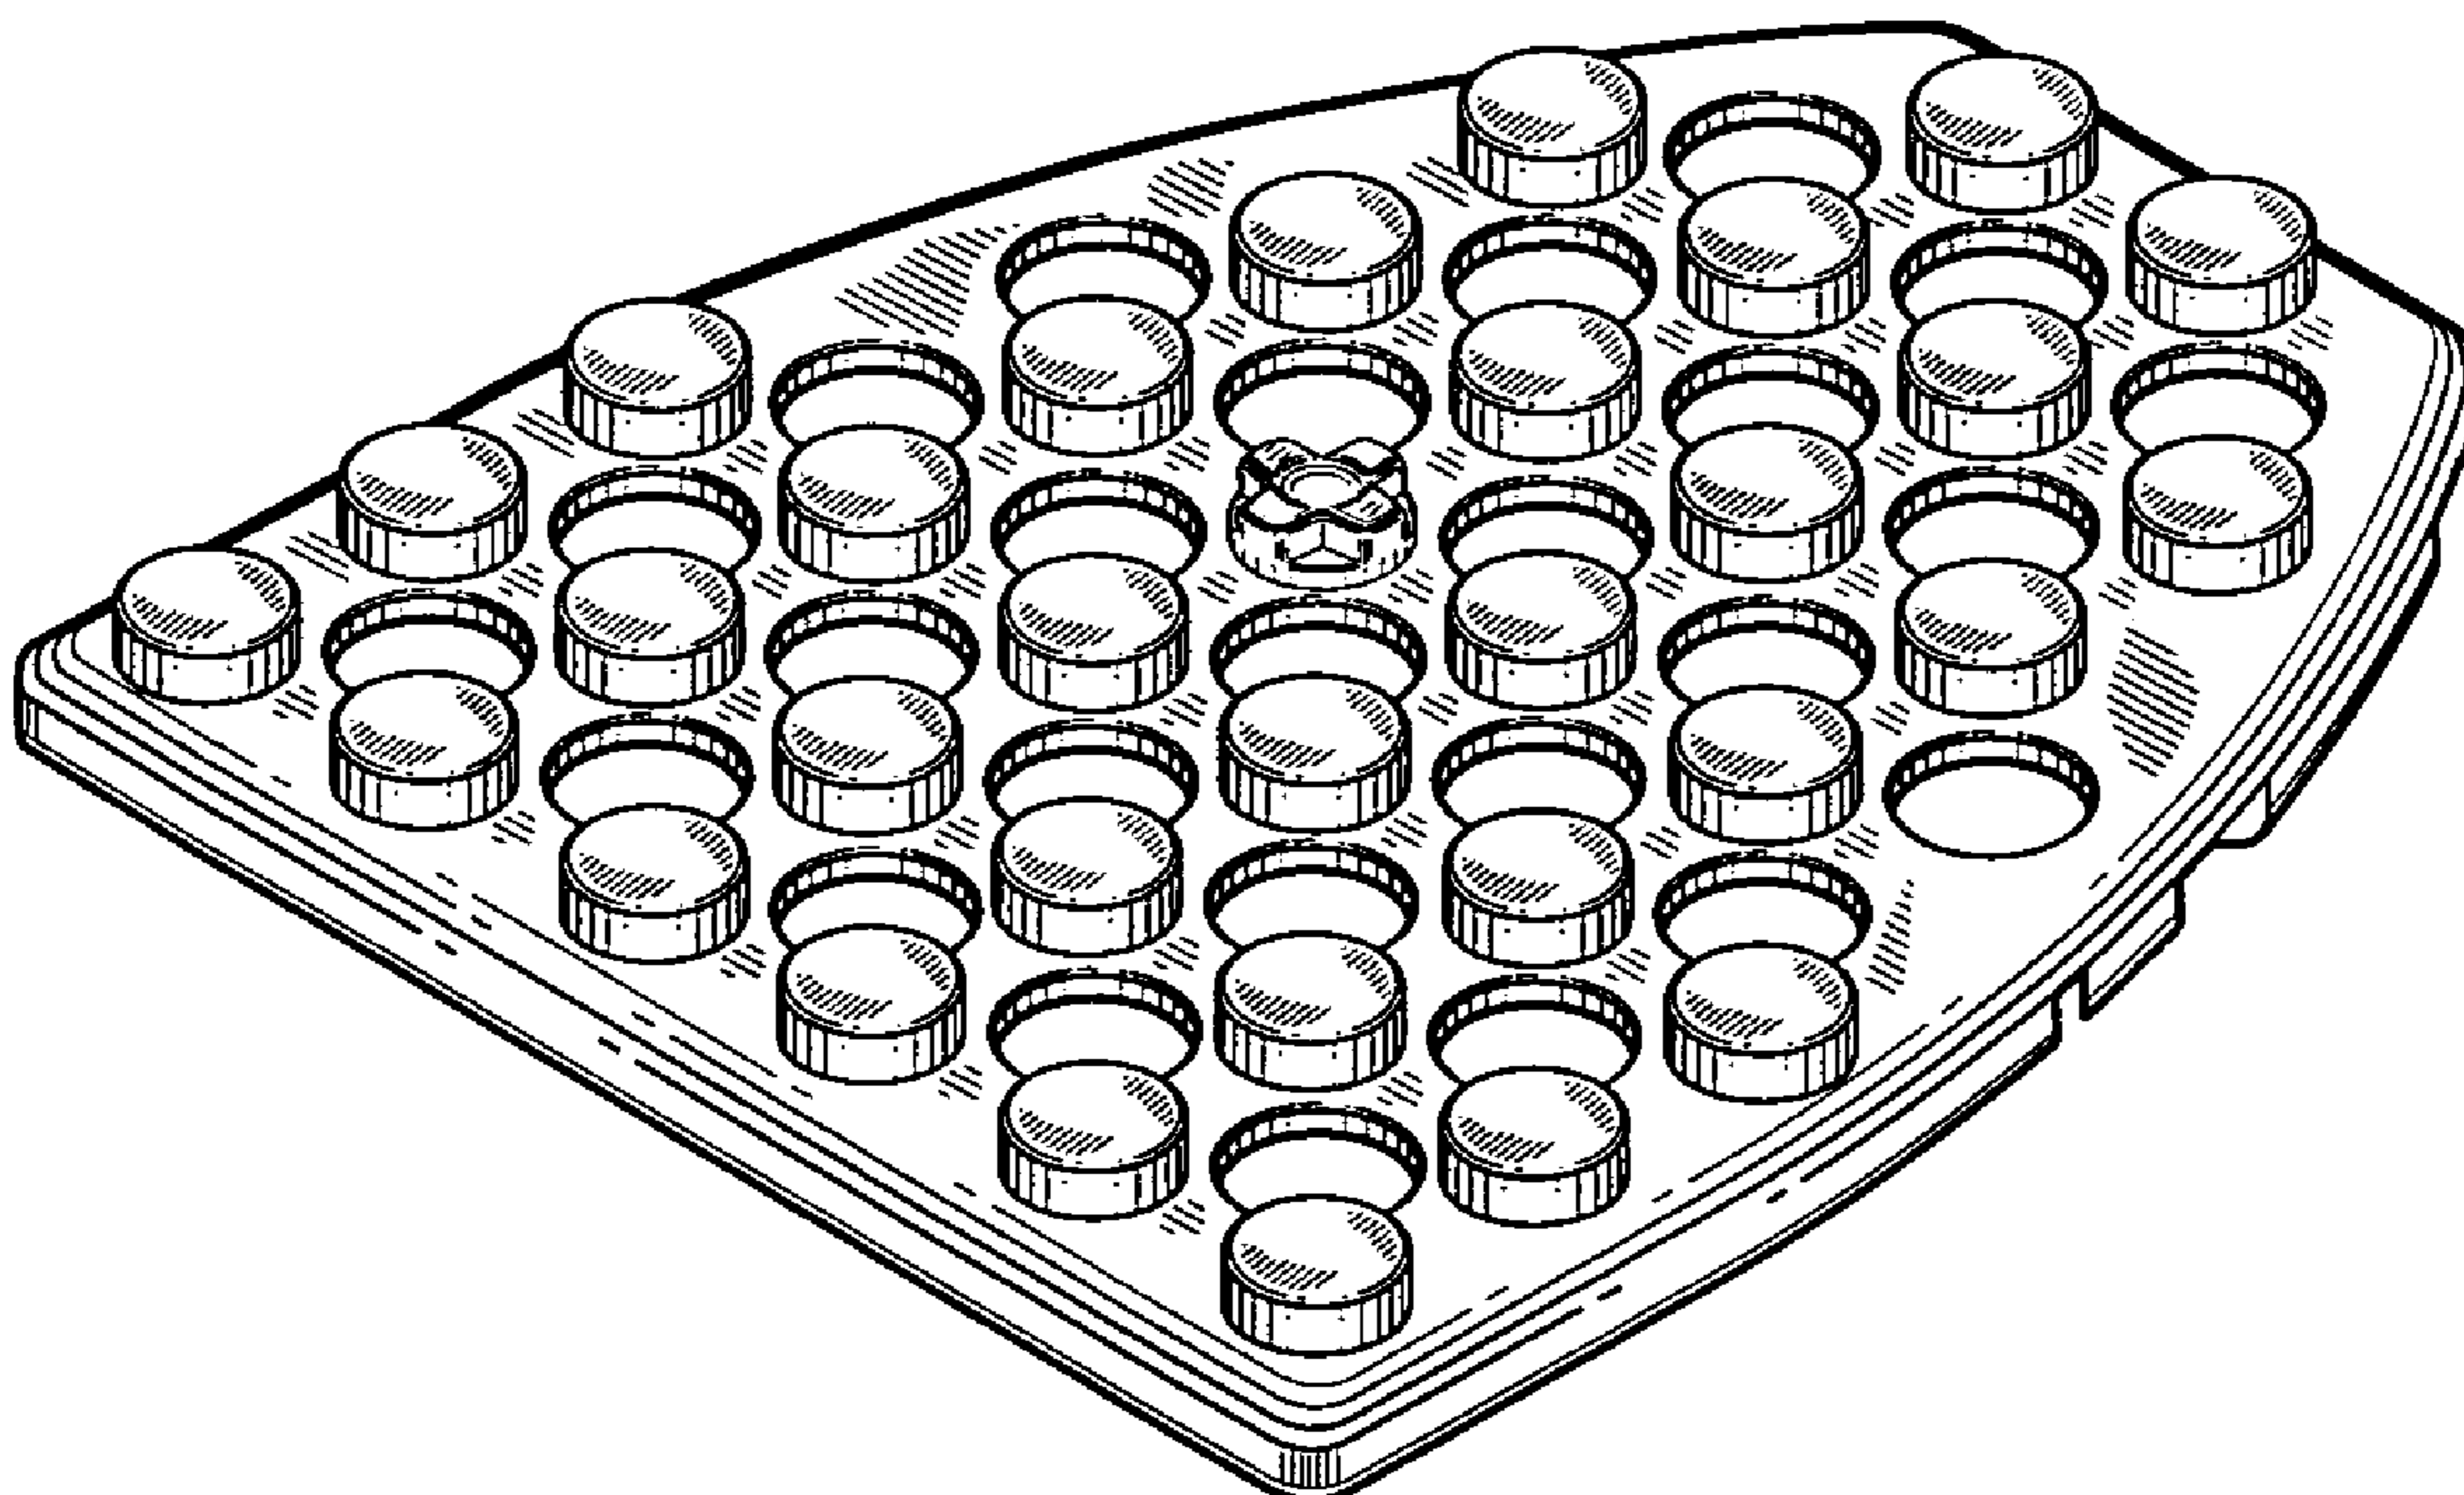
is a front elevation view of the construction toy component of FIG. 1;
